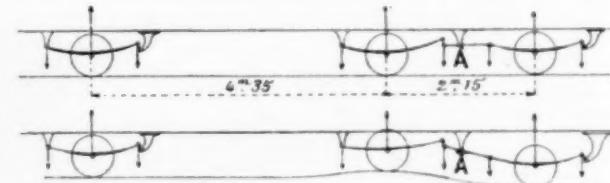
BALANCED SUSPENSION ARRANGEMENT OF THE PARIS SIX-WHEEL MOTOR BUS
